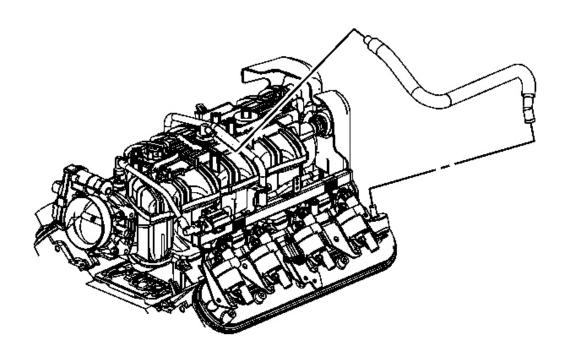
Positive Crankcase Ventilation Hose/Pipe/Tube Replacement Courtesy of GENERAL MOTORS CORP.
